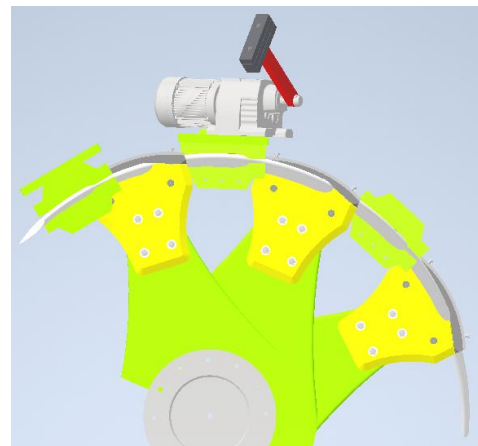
Representative test fixture with rotating mass fatigue test equipment mounted on the blade.
